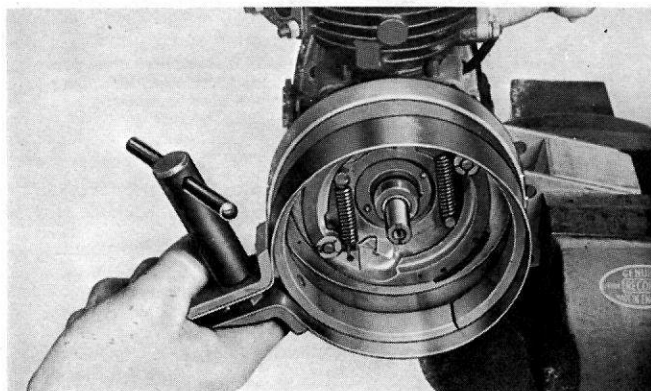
Fitting the Inertia Ring into the Driving Plate using Tool No. 56
